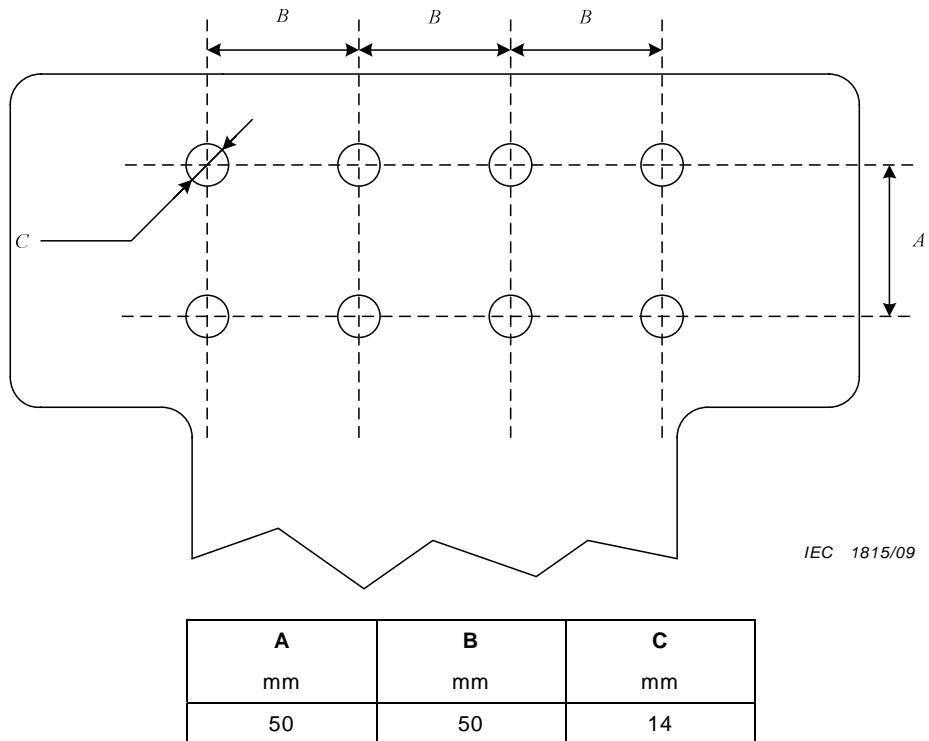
Eight hole HV terminal (2×4 hole pattern)
